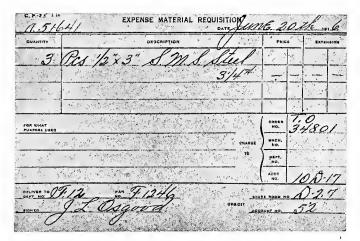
Form used by Tool-room Foreman in ordering Materials required for Making Tools
